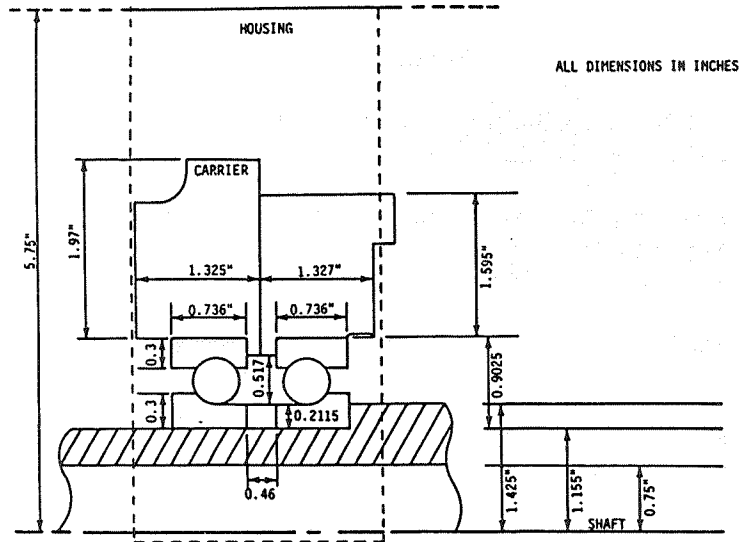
DETAILED RADIAL REPRESENTATION OF 57mm BEARING
